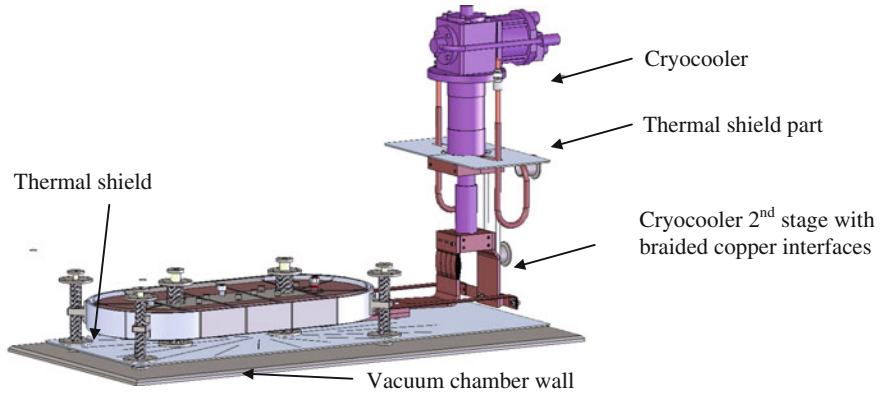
Bolt-on design (vacuum chamber open for clarity), directly to cold plate and race track cold mass with lead in/out
